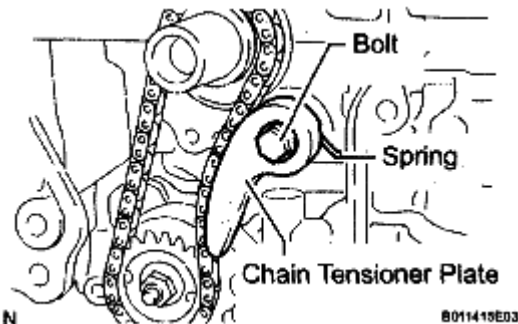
Identifying Bolt, Chain Tensioner Plate And Spring
